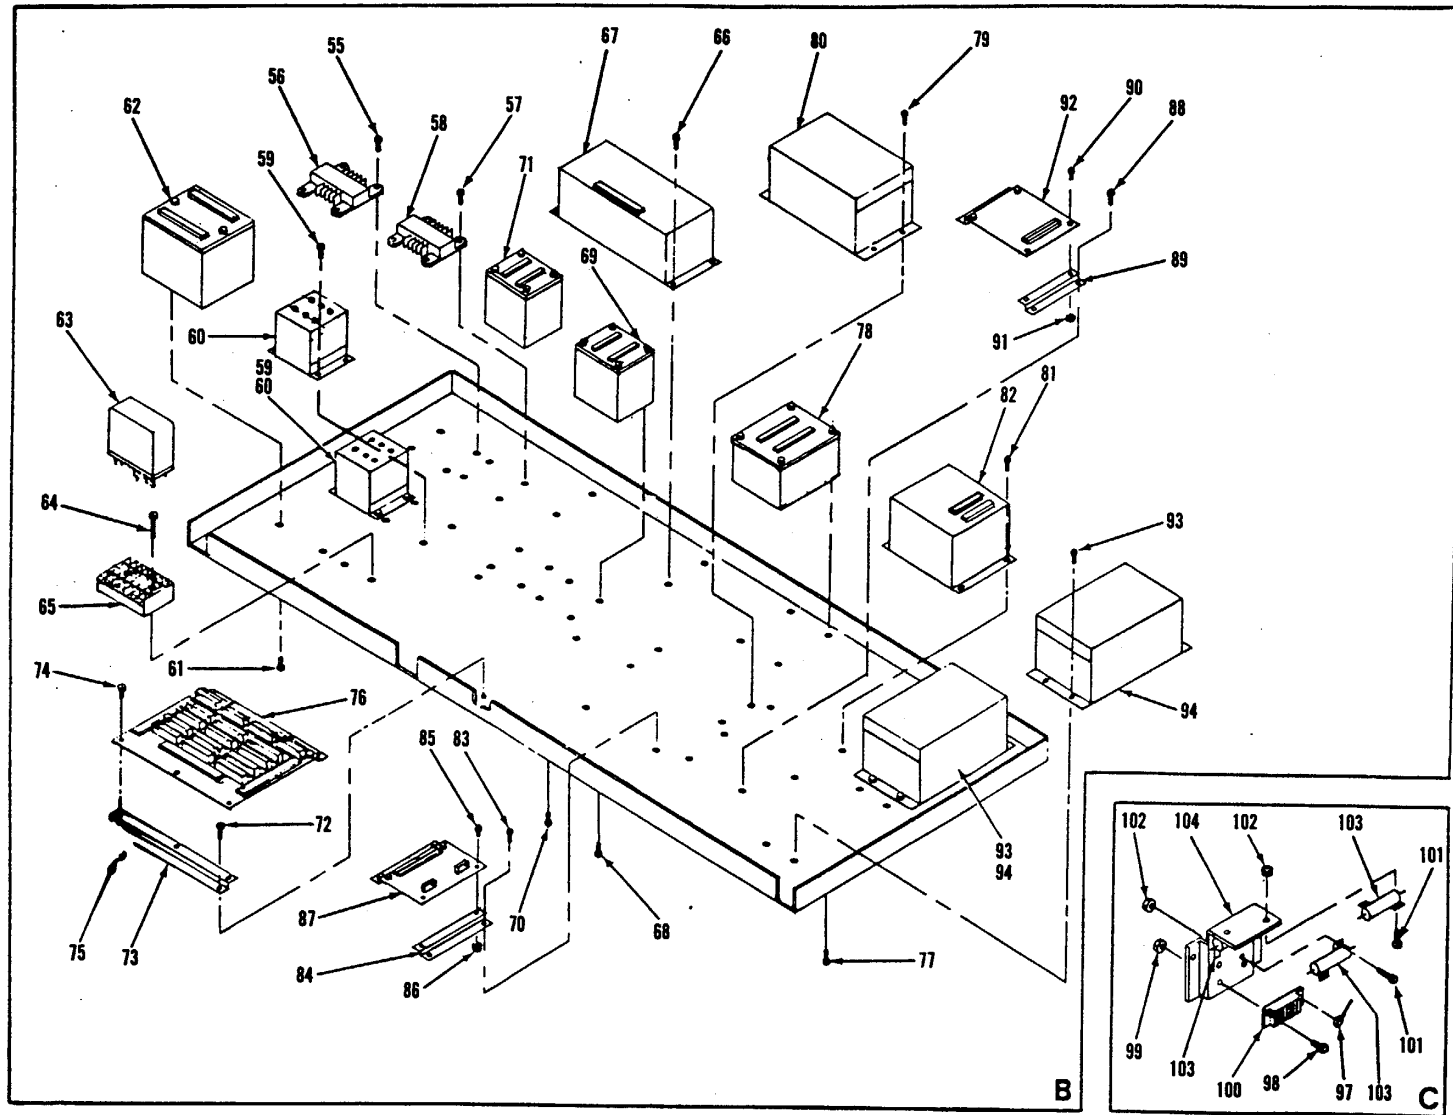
Control Cubicle, Exploded View (Sheet 2 of 2)
